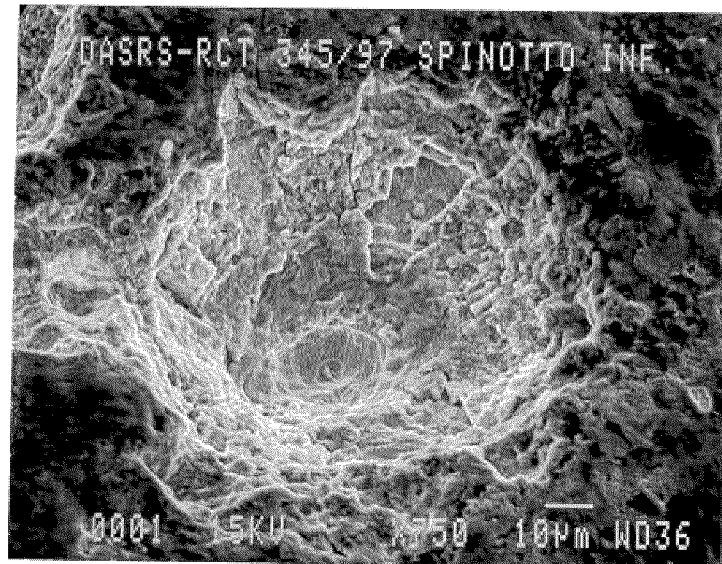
Fretting Corrosion on the MB.339 Landing Gear spine
